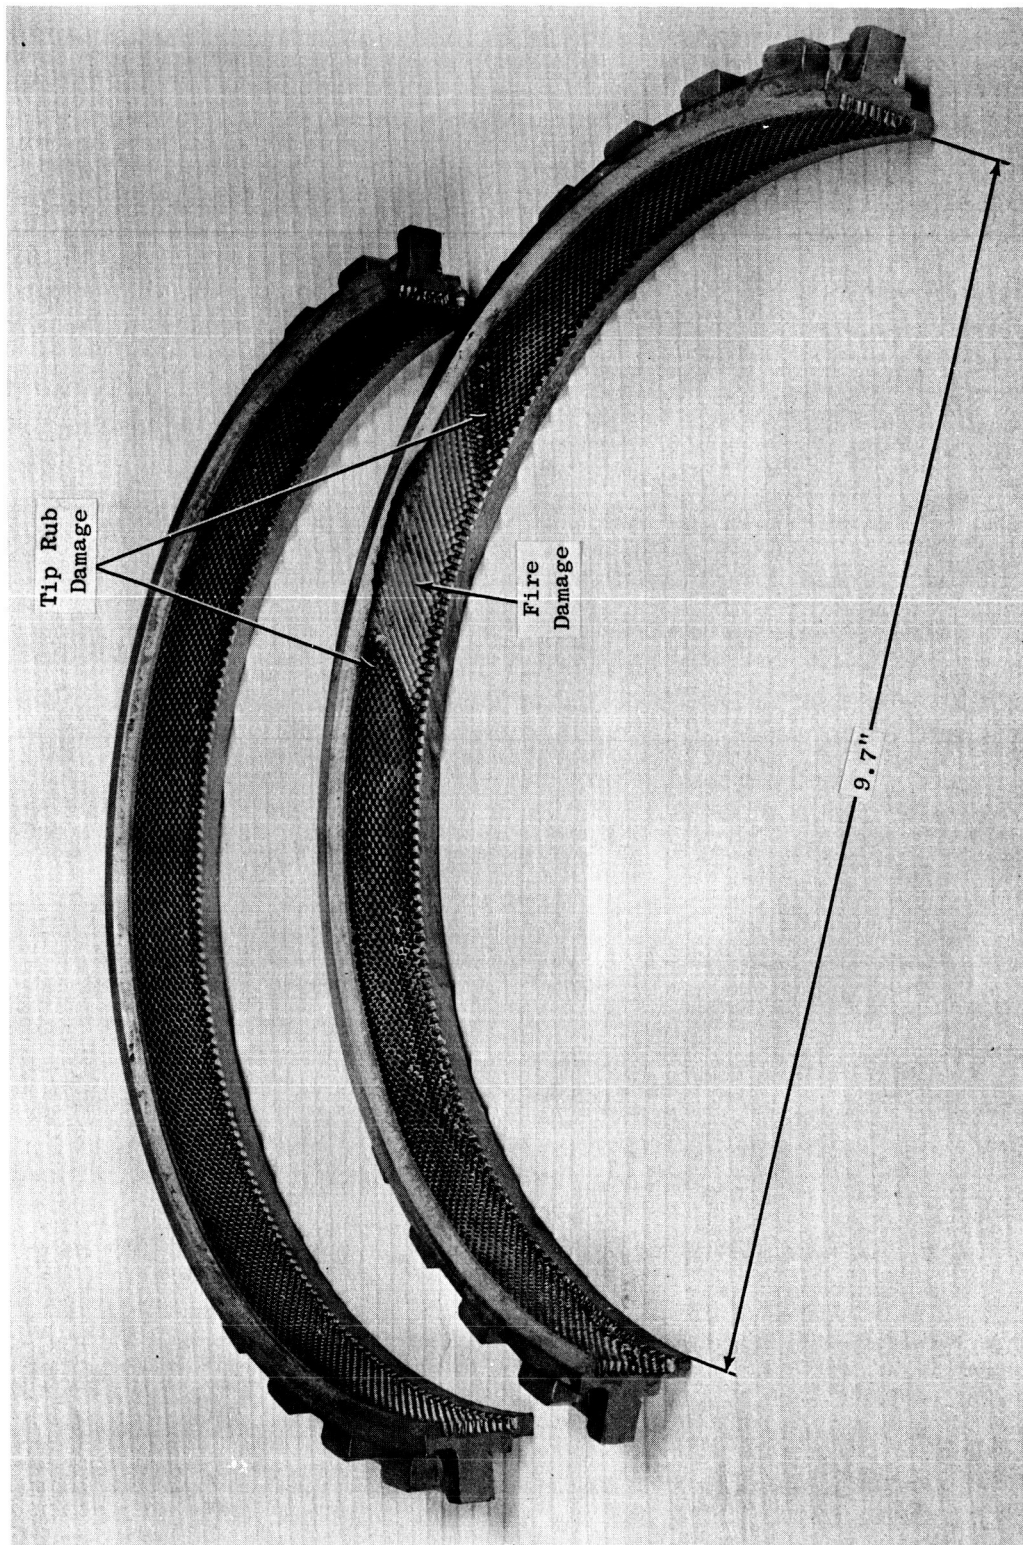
Second Stage Honeycomb Tip Seal Following Casing Disassembly.
